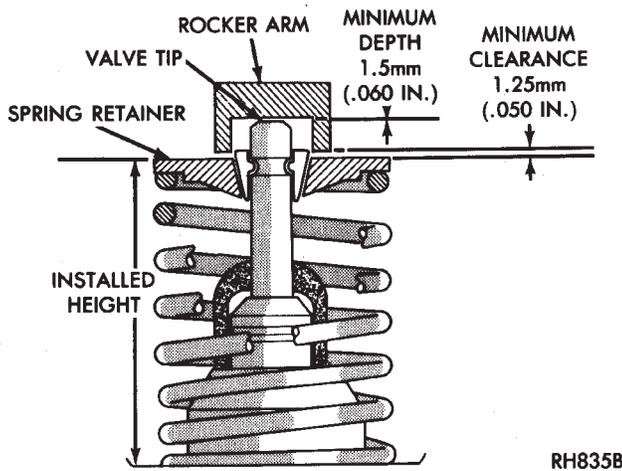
Checking Spring Installed Height and Spring Retainer Clearance
